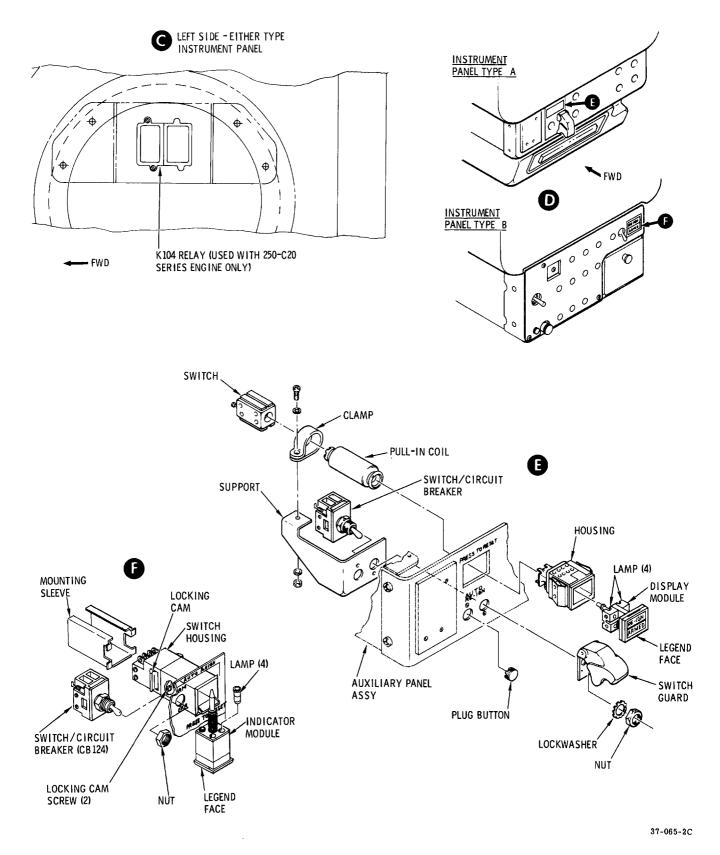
Engine automatic reignition equipment (sheet 2 of 2)
